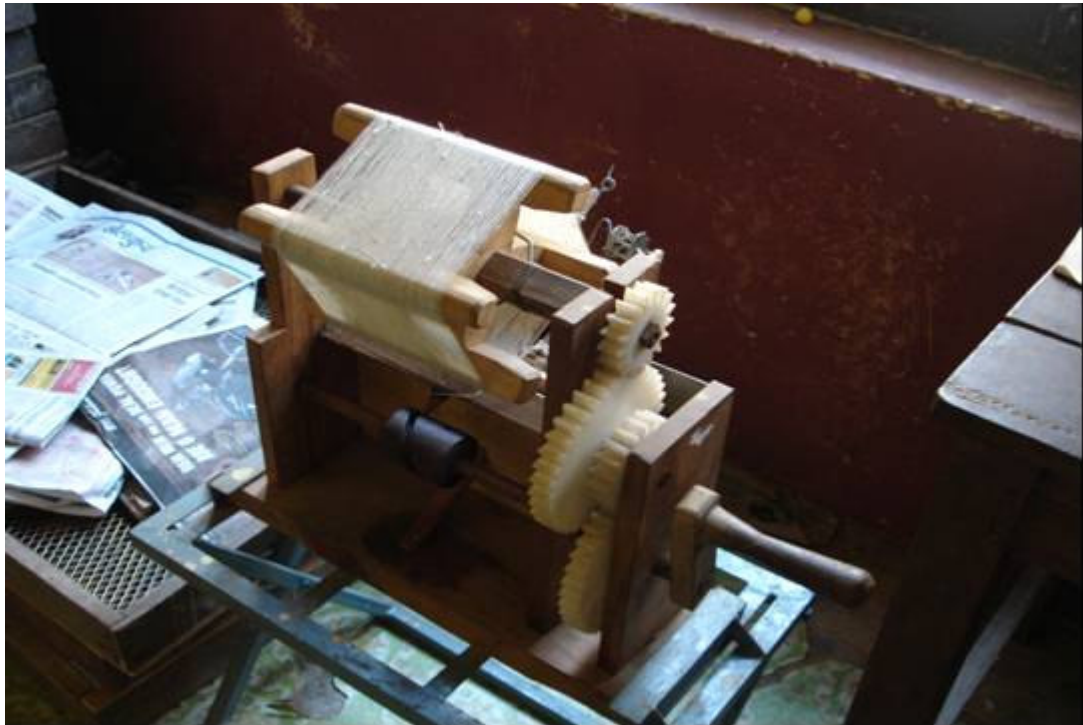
A view of the Silk reeling machine, developed locally (prototype)
